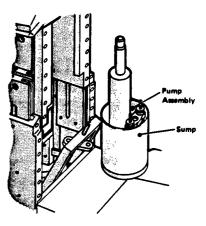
PUMP REMOVED FROM TABLE.
